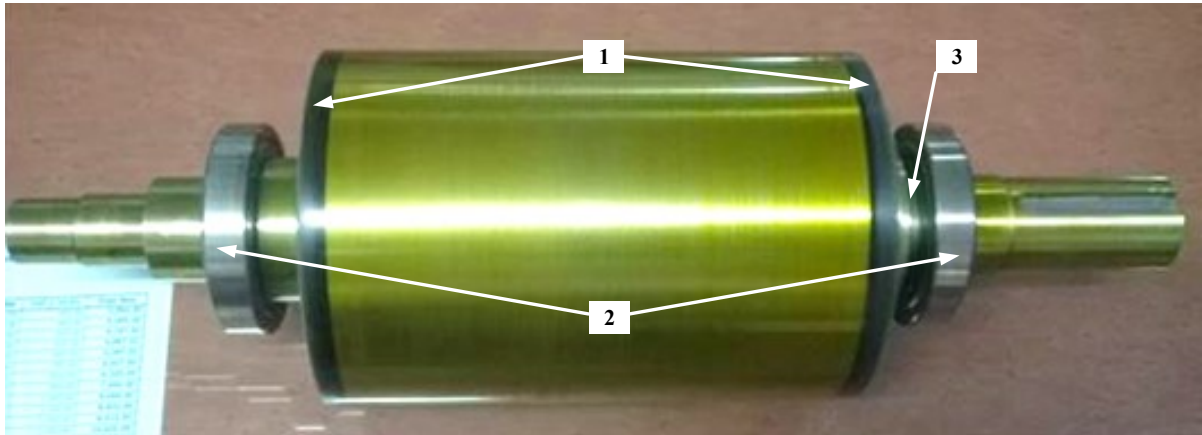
Complete prototyped rotor. (1) Bakelite (Hylam) plates. (2) Bearings. (3) Lock nut.
